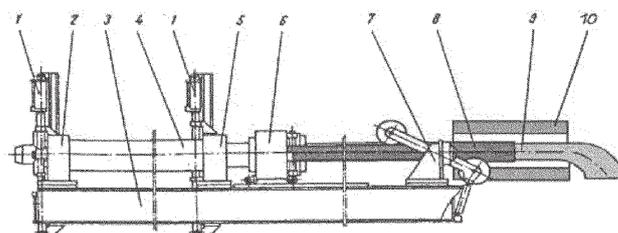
Cinematic structure of bending equipment with mandrel pulling and induction heating: 1- hydraulic cylinders; 2 and 5- support bearings; 3- frame; 4- linear hydraulic motor; 6- pusher; 7- locking pawl; 8- pipe; 9- supporting mandrel; 10- heating coil
